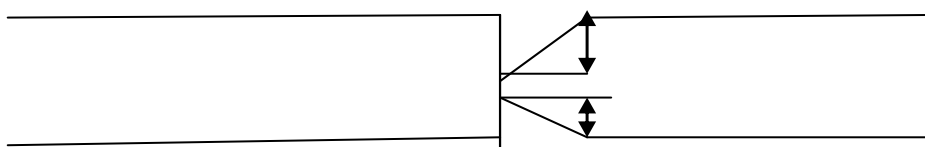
GROOVE Butt joint-PJP- PARTIAL JOINT PENTRATION
